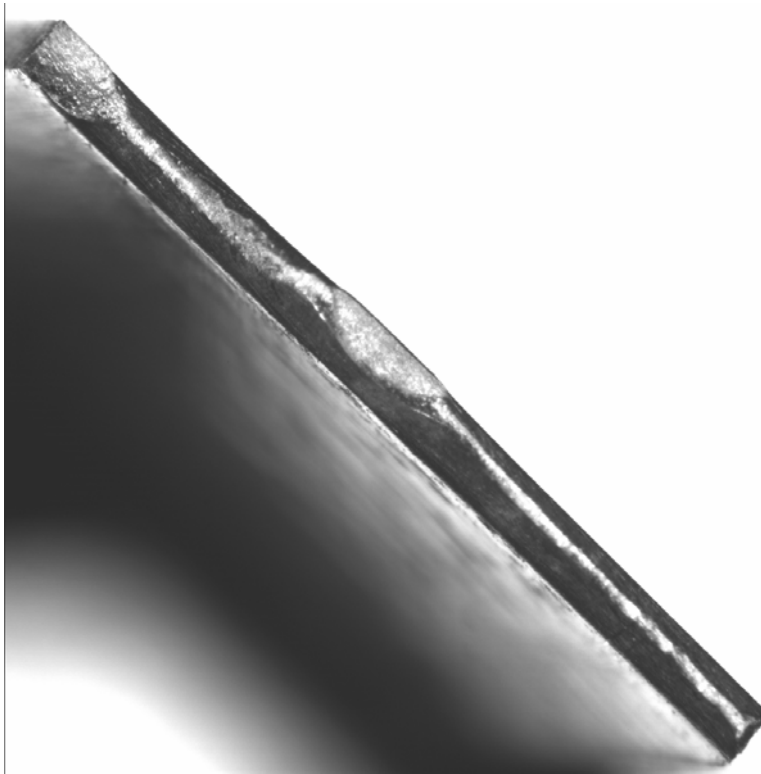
Fracture Surface of Specimen 5636.
